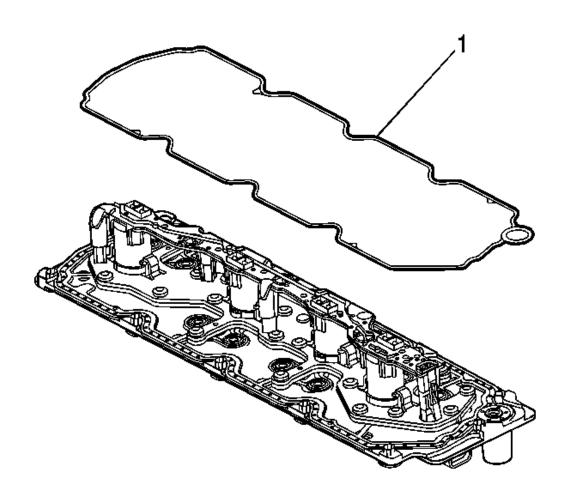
Identifying Valve Cover Outer Gasket Courtesy of GENERAL MOTORS CORP.
